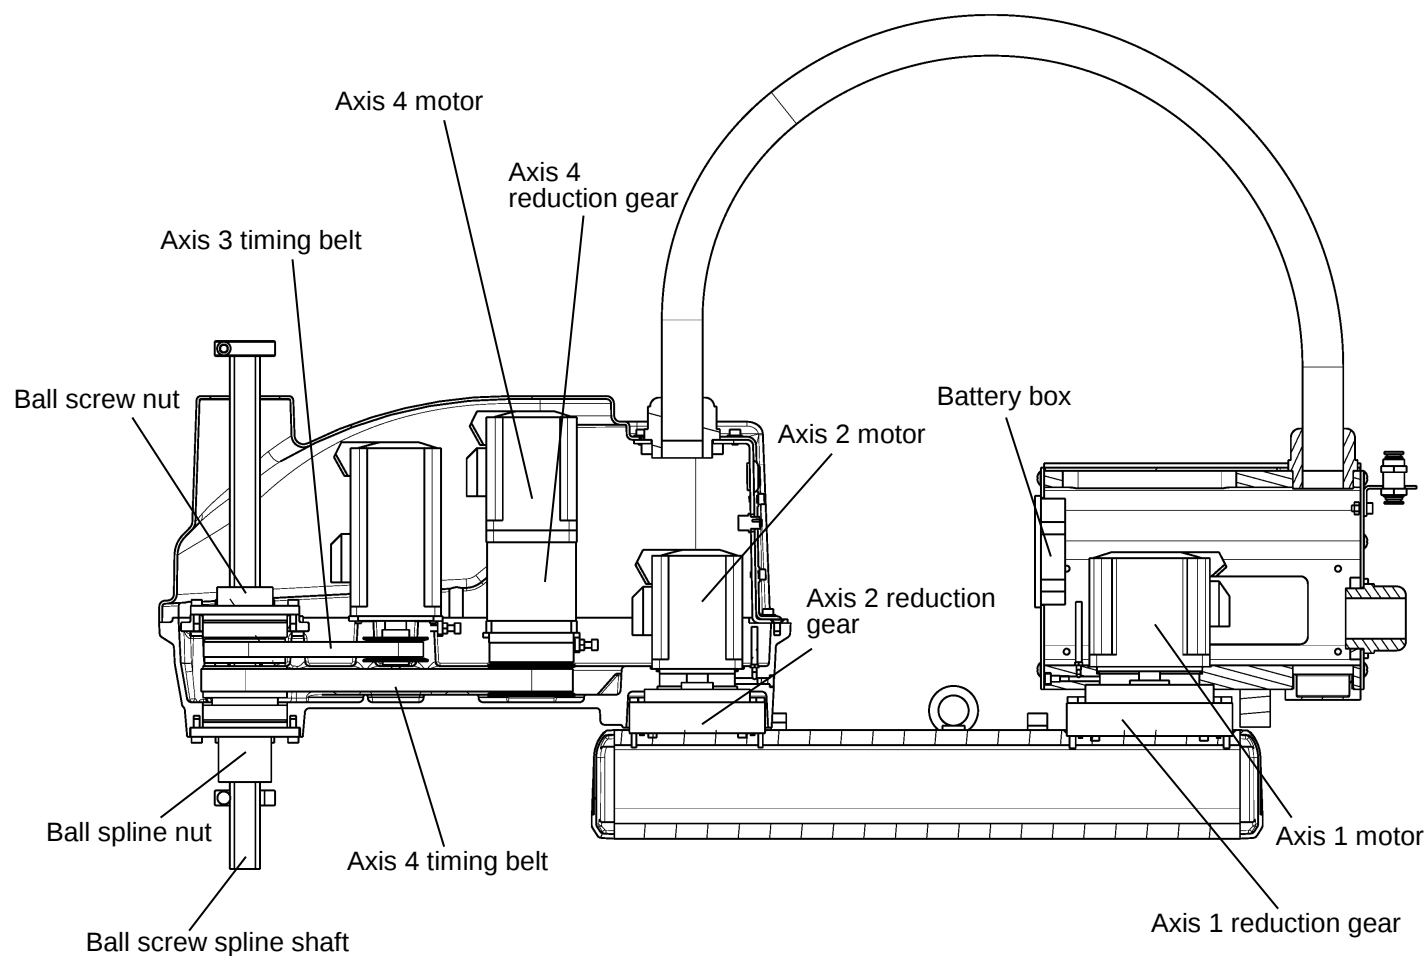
Layout of robot mechanical components (KHL-500-T/KHL-600-T/KHL-700-T)
